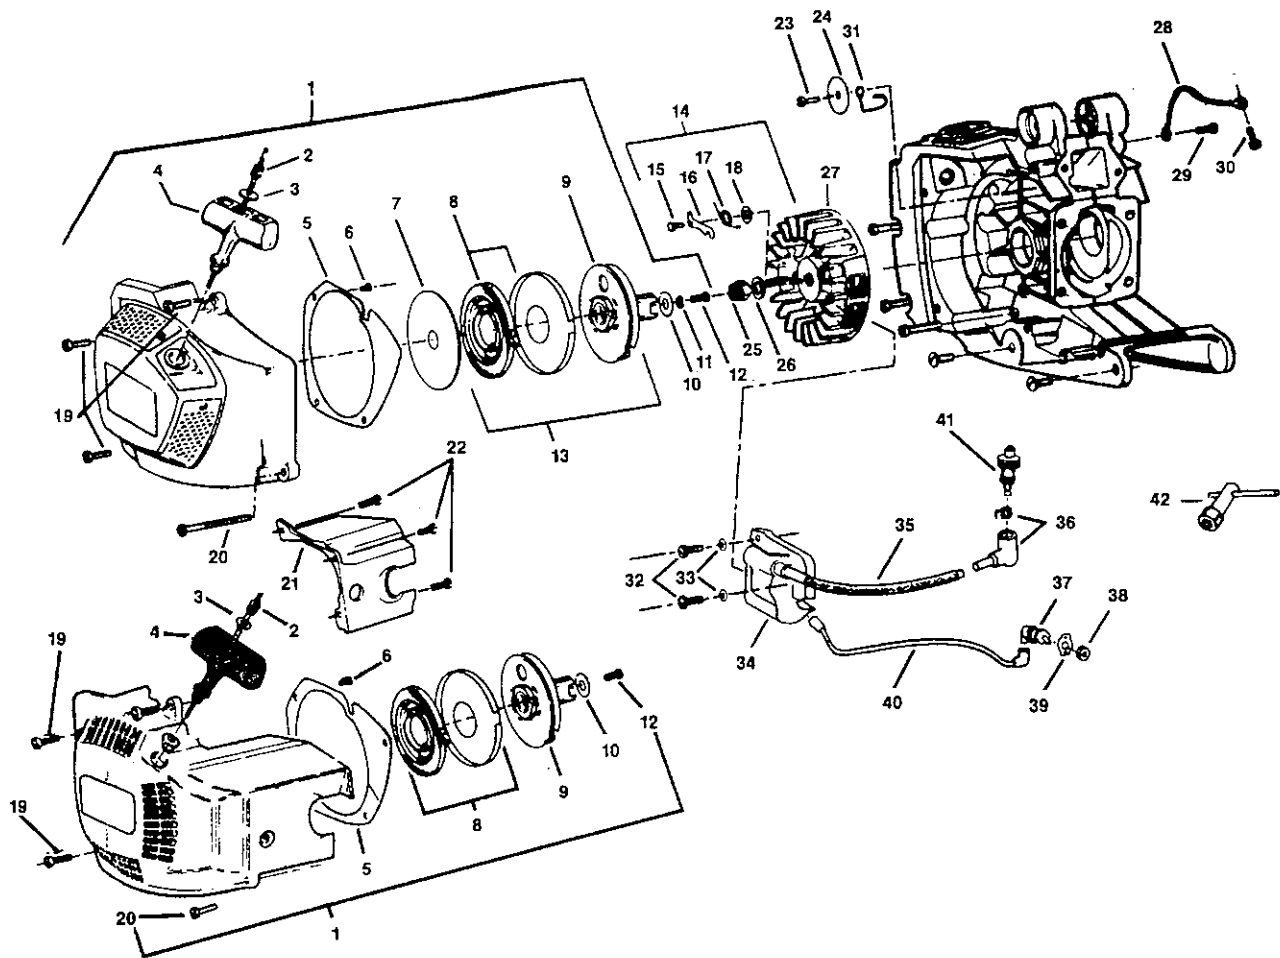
FIGURE V - PARTS LIST STARTER, FLYWHEEL AND IGNITION (Revised December, 1992)
